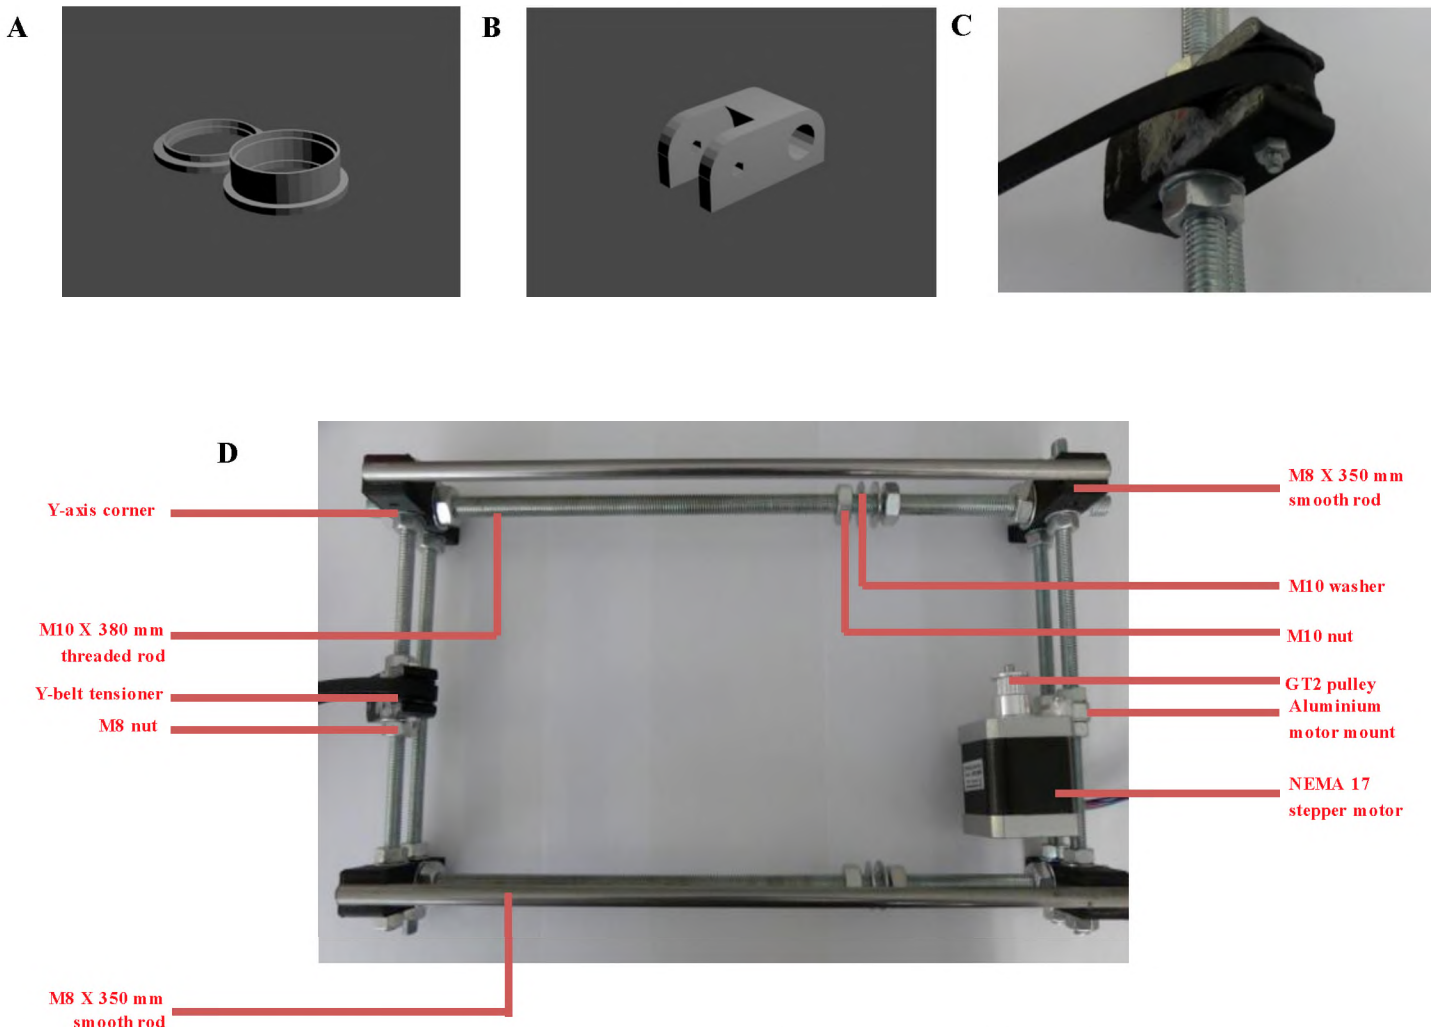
Y-axis vertical and horizontal side. A: Printed 623 bearing guide pair. B: Printed Y-belt tensioner. C: Assembled Y-axis tensioner. D: Assembled Y-axis frame.
